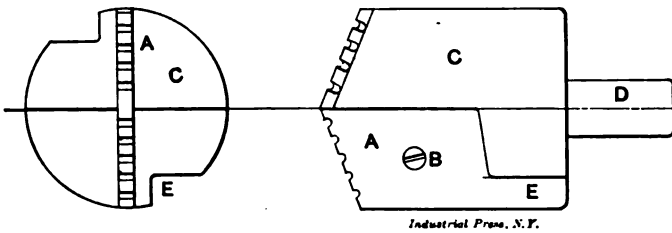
Flat Drill with Inserted Blade for Deep Drilling
